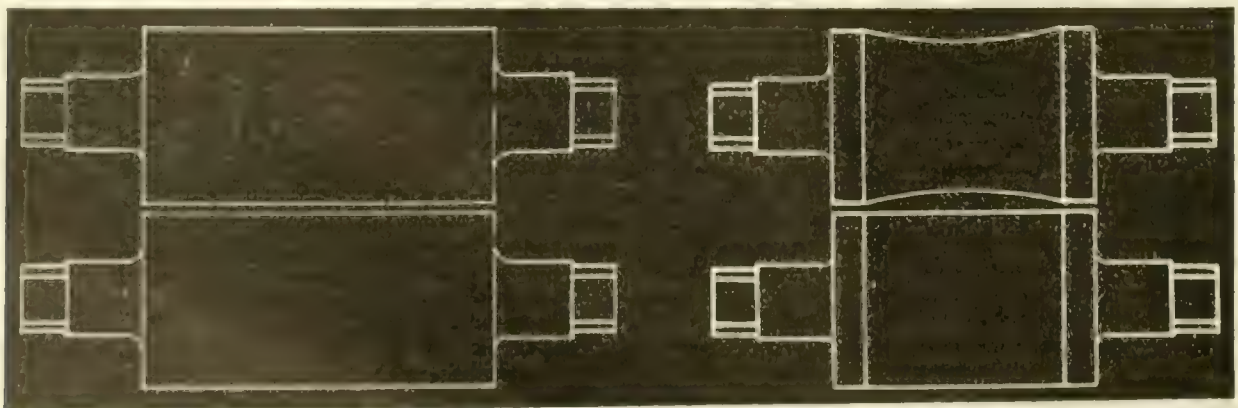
EFFECT OF MAKING HEAVY PLATE ON AMERICAN MILL. THE ROLL IS TURNED FLAT AND FINISHING ROLL IS TURNED TO PREVENT THE ROLL EXPANSION.
